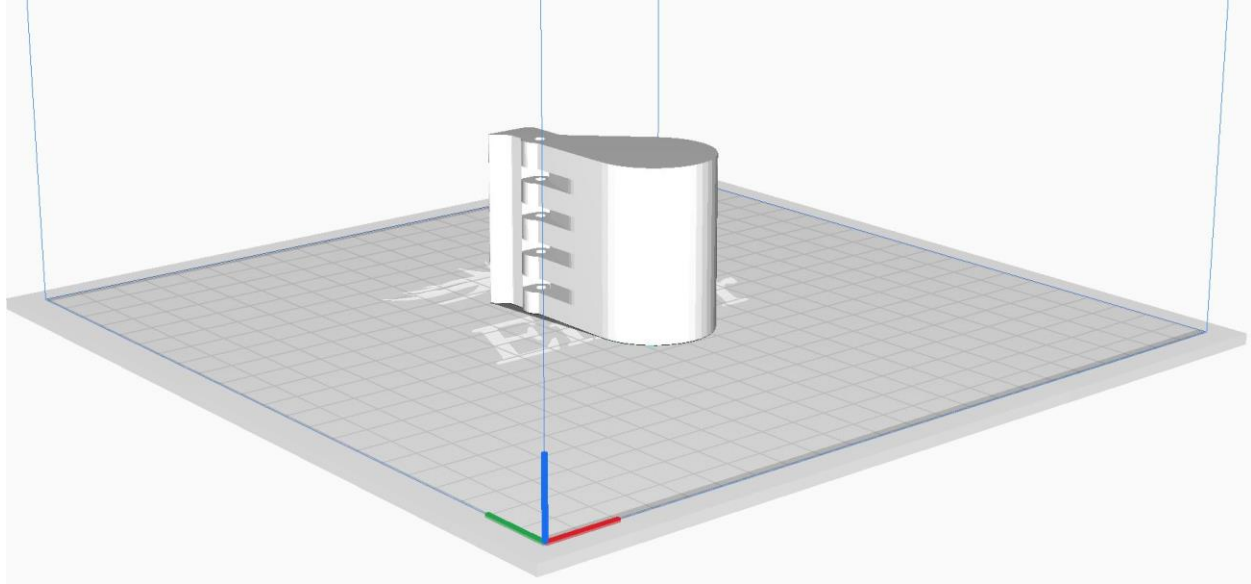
Print orientation for the handle of the wheels module. Note that care should be taken to ensure that the gaps for the springs are cleaned out well enough for the springs to fit, as supports will want to fill this space.
